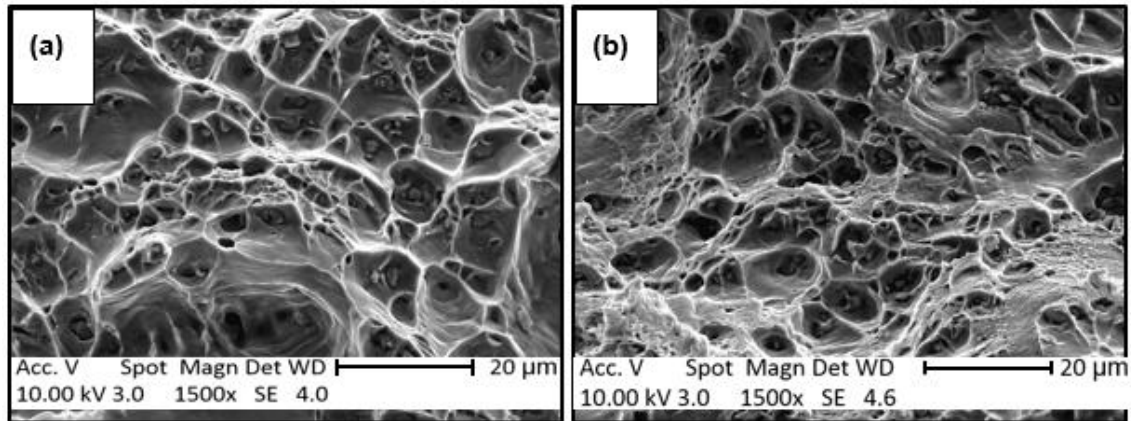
Fracture surface of (a) 20 %EP and (b) 50 %EP
